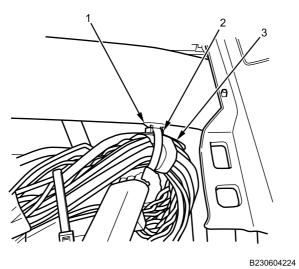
Right Side IP Harness Cable Lock Strap Removal.
